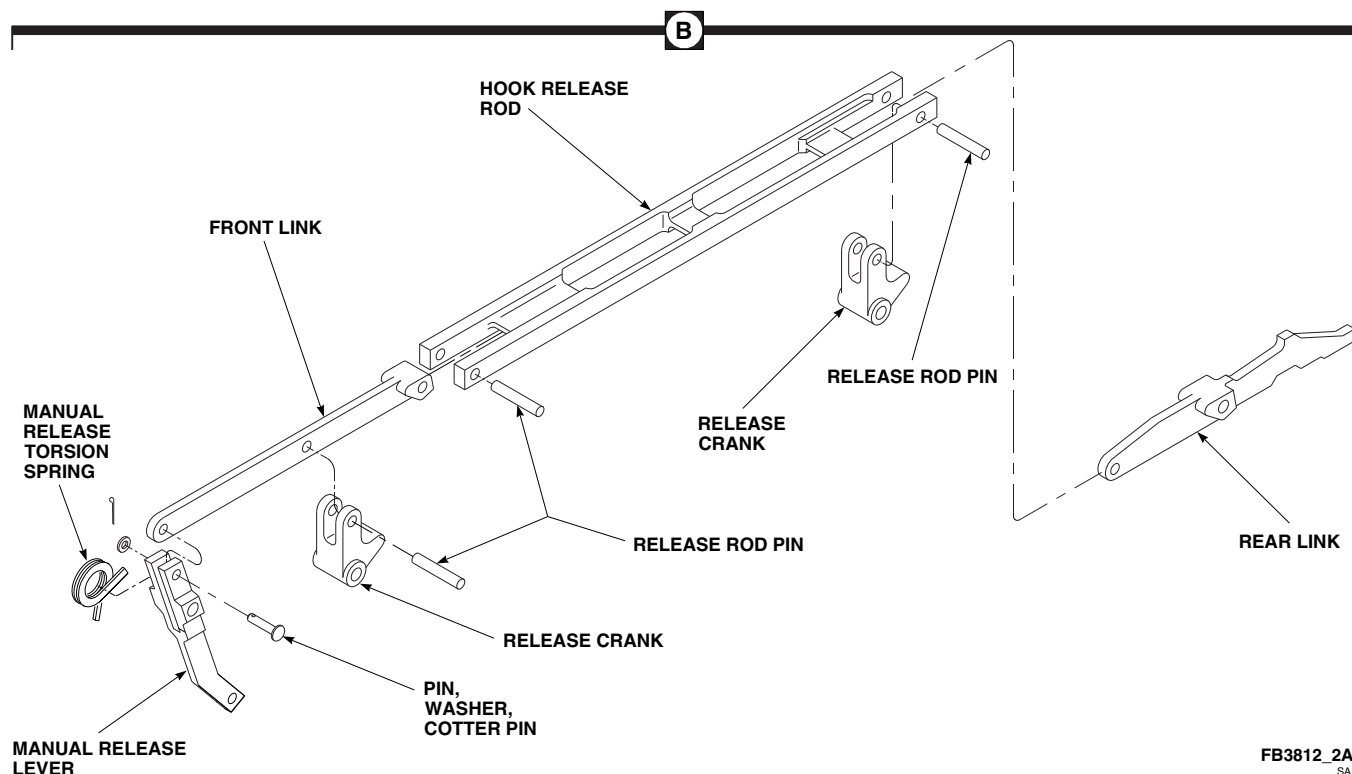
REPLACE HOOK RELEASE ASSEMBLY AND WIRING HARNESS (SHEET 2 OF 2)
